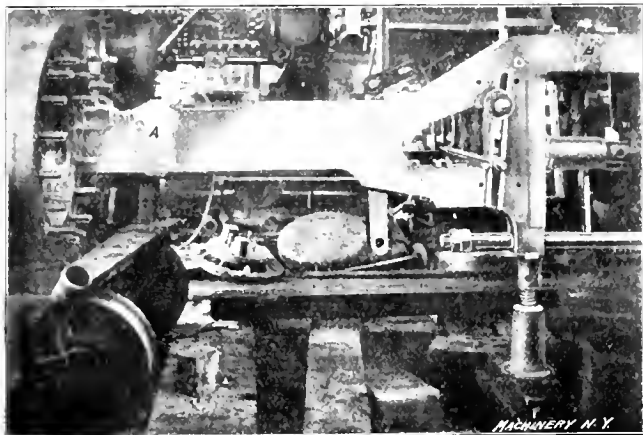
New Section of Frame Welded to the Old by the Thermit Process
